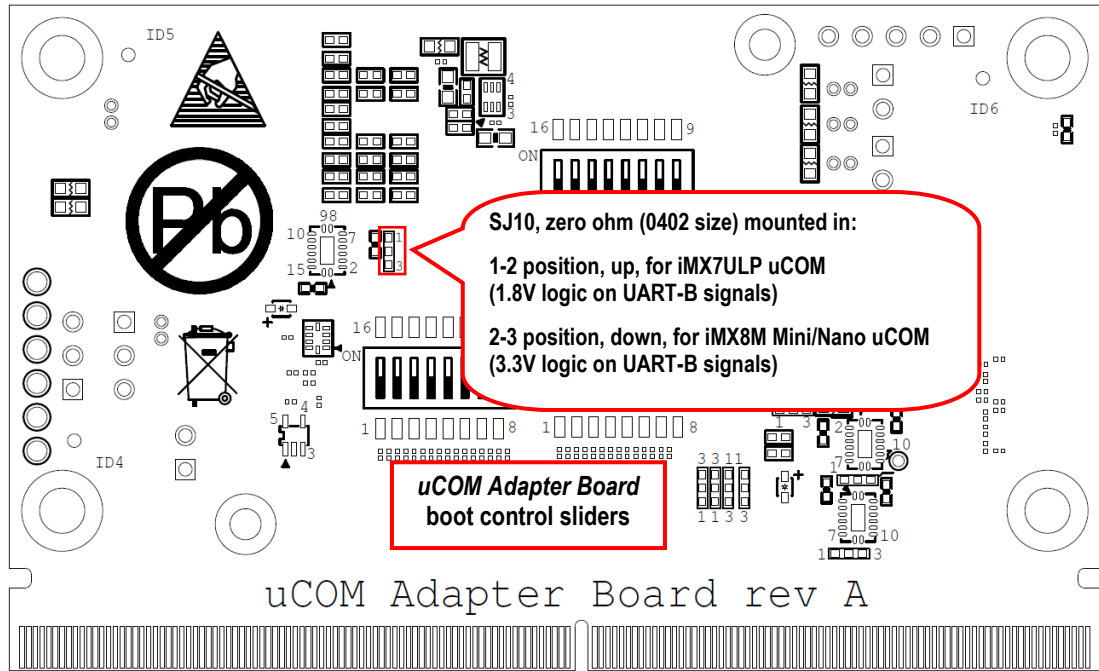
uCOM Adapter Board rev A, SJ10 Location, Bottom Side
